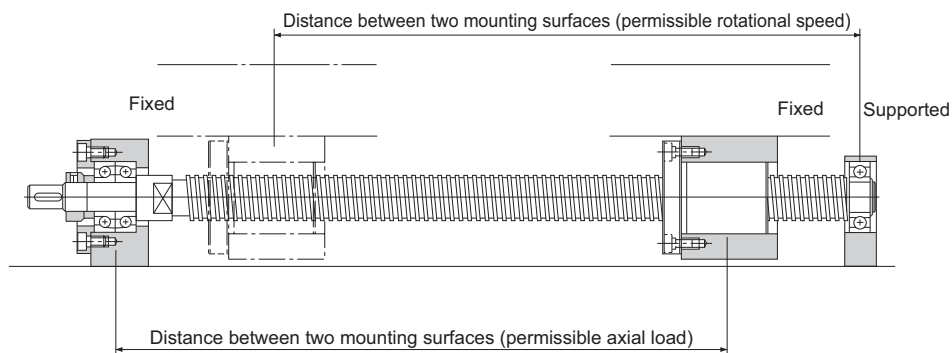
Screw Shaft Mounting Method: Fixed - Supported
